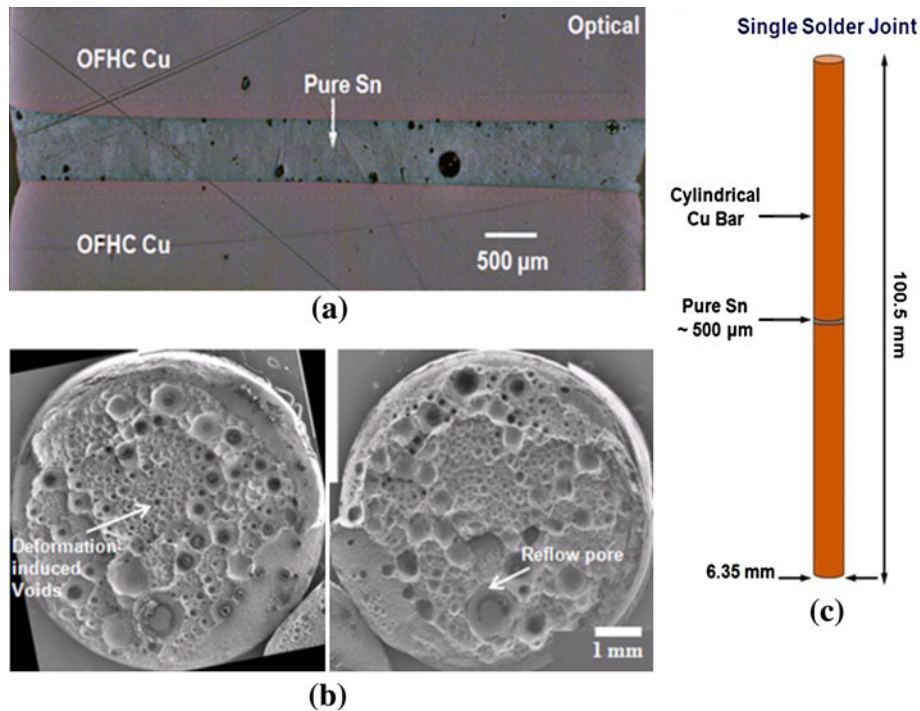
Solder joint with microvoids before and after fracture. (a) Optical image of the side view of the joint. (b) Scanning electron microscopy image of the crack surface. (c) The overall geometry of the single solder joint with copper bar.
